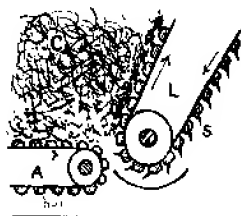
INCLINED LATTICE WITH SPIKES FOR OPENING AND ELEVATING COTTON
